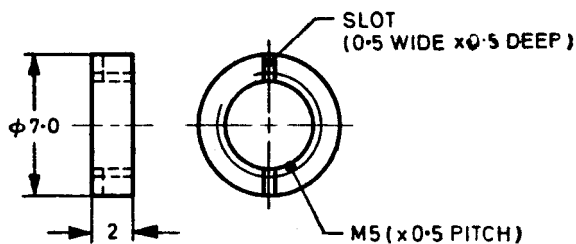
BASE PLATE FOR POT CORE CLAMP
